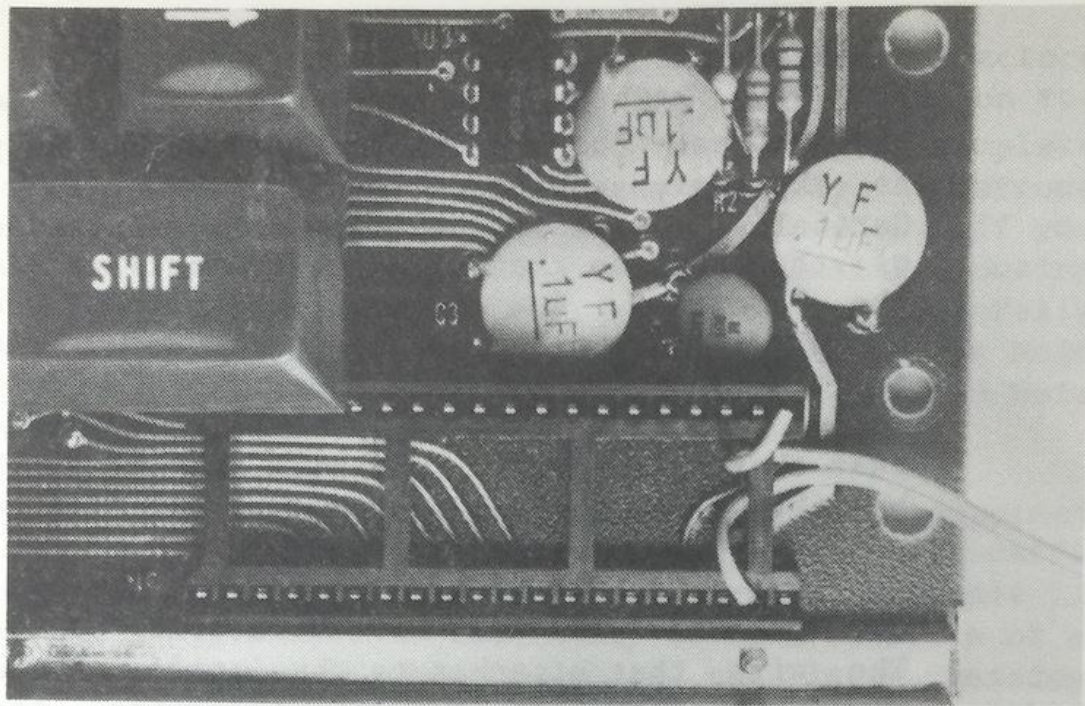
Jumper Cable Connection with Keyboard IC, Early Keyboard Version
